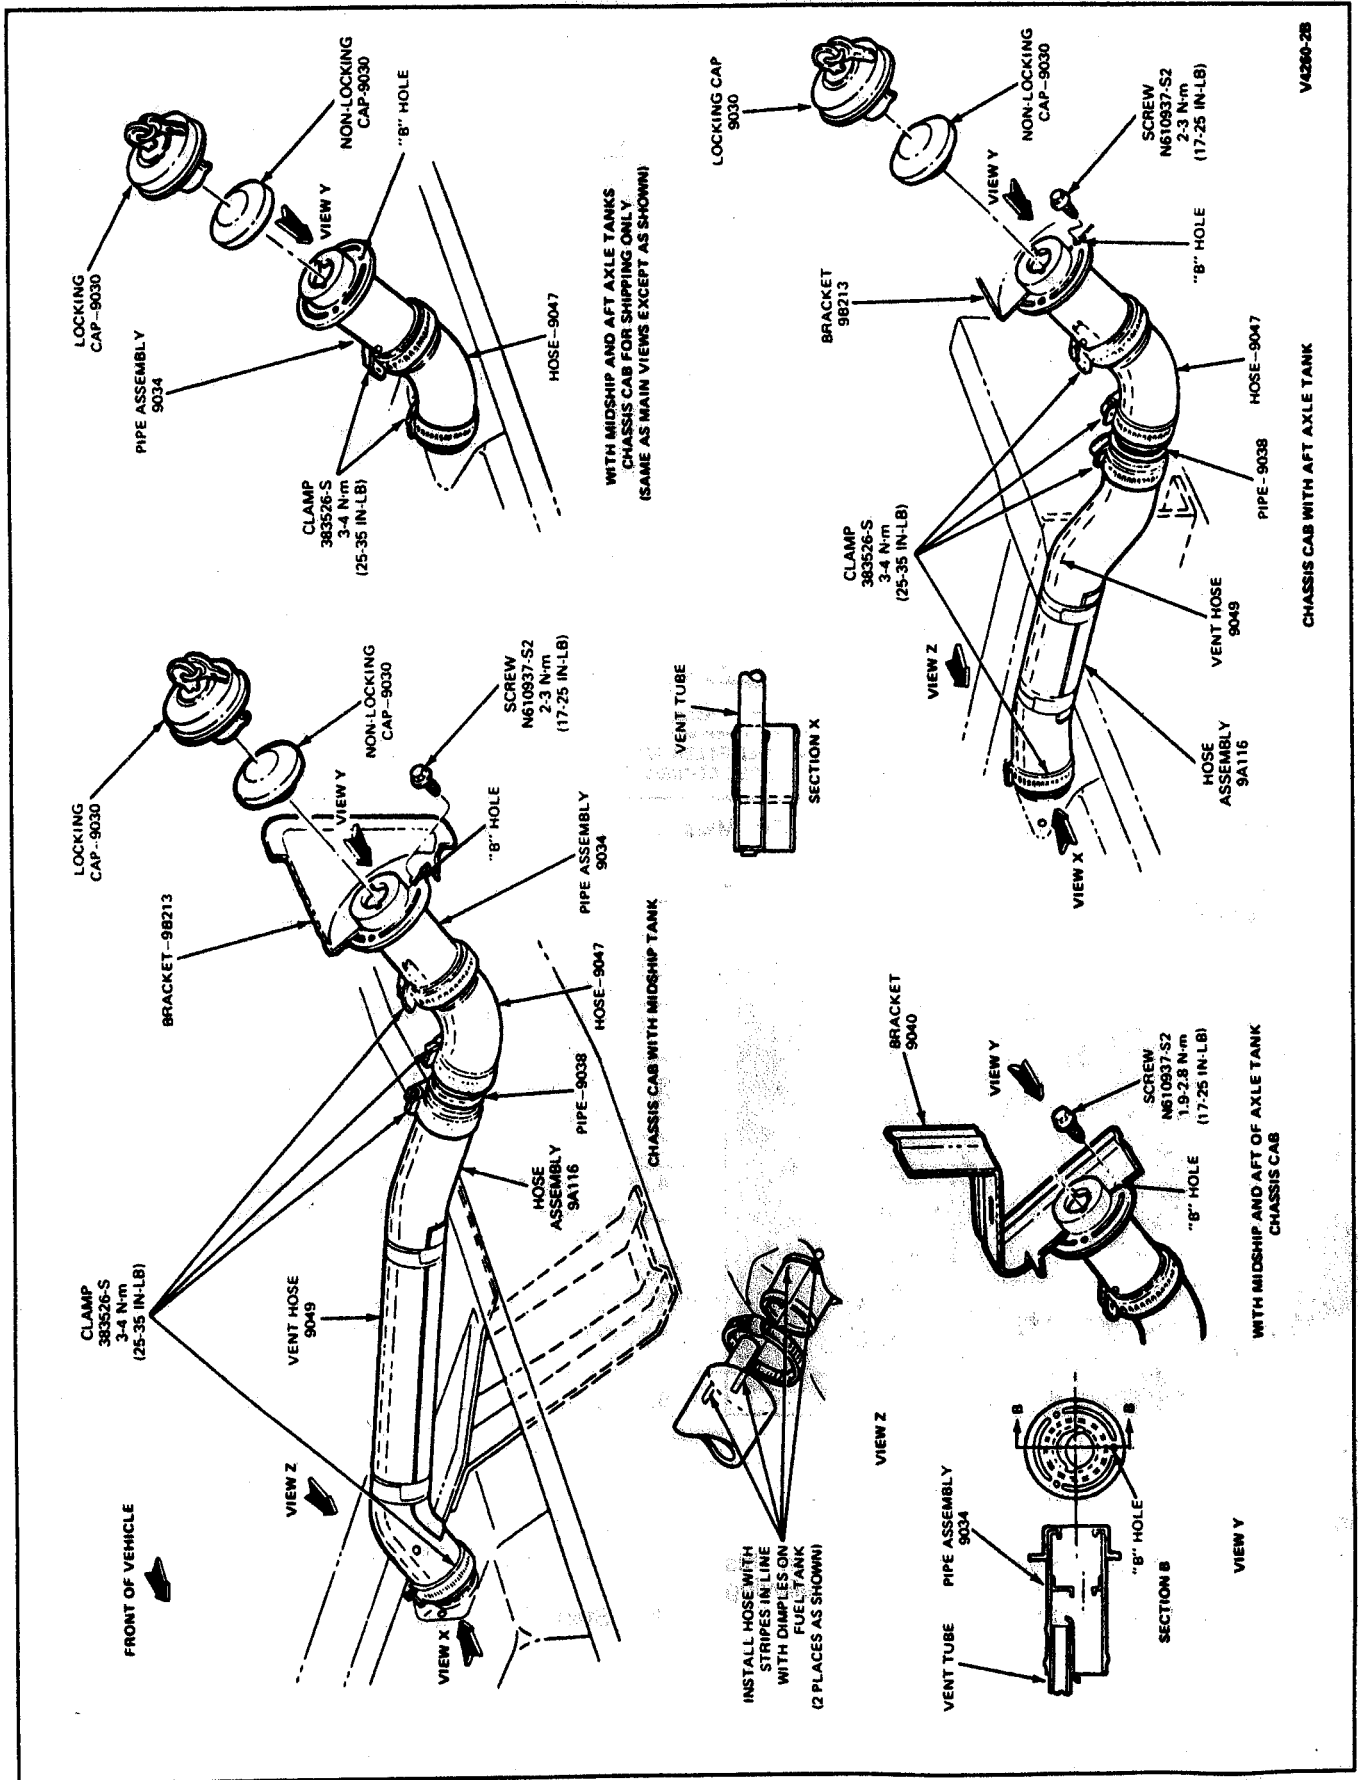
Fuel Filler System Installation—F-Series Chassis Cab
